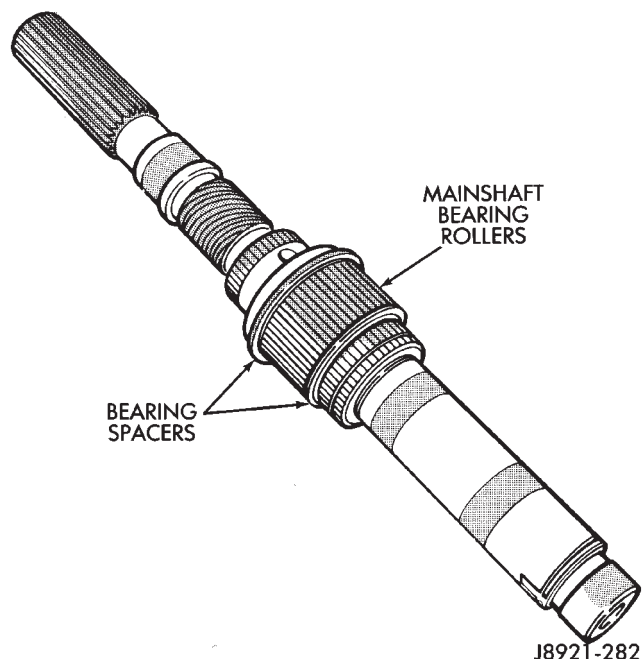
Installing Mainshaft Bearing Rollers and Spacers
